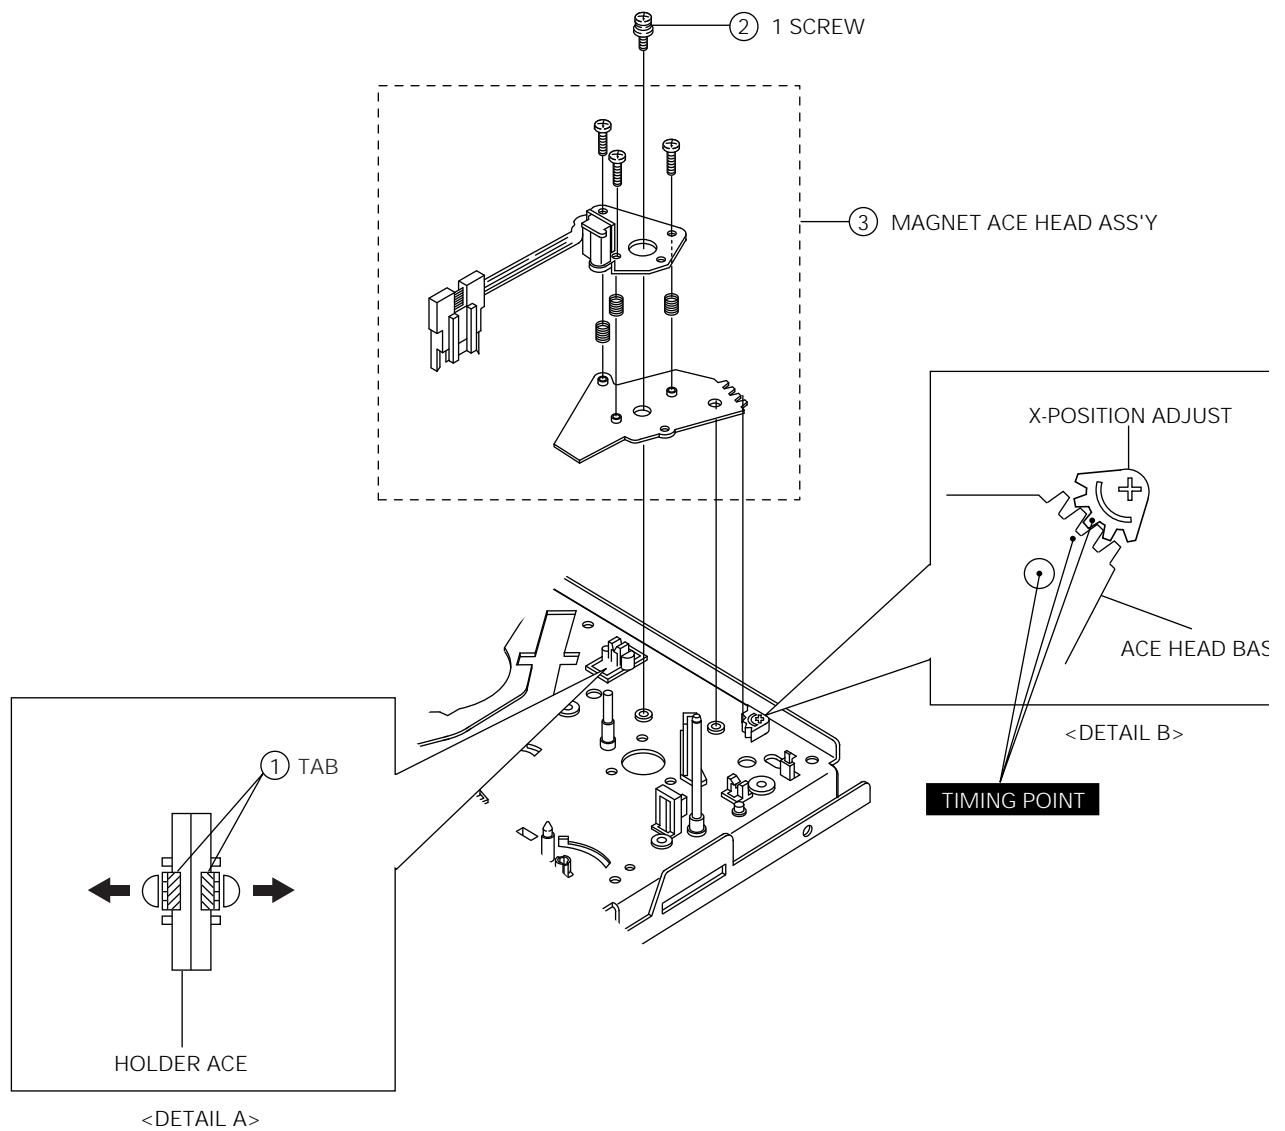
ACE Head Ass'y Removal and Reassembly
